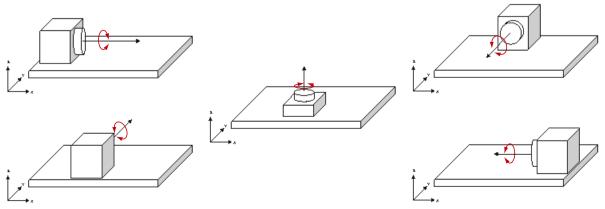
supported configurations of machine tools with a single, bed mounted rotary axis
